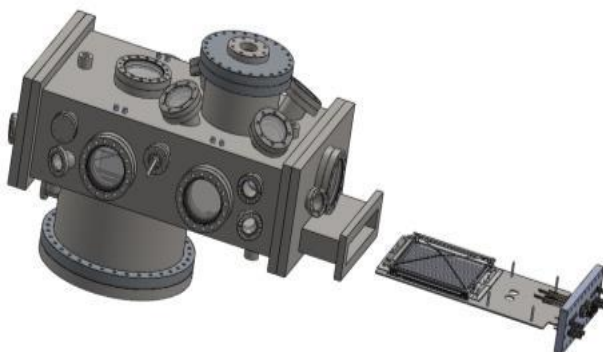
Final assembly of the LAPPD™ is done in an ultra-high vacuum (UHV) tank.
